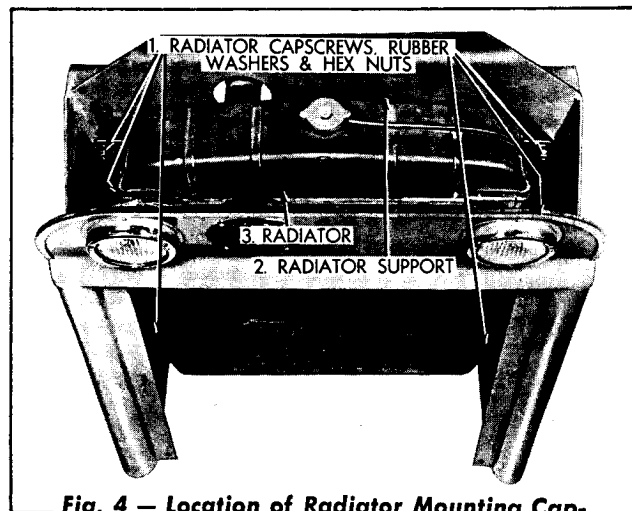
Location of Radiator Mounting Capscrews, Rubber Washers, and Hex Nuts
